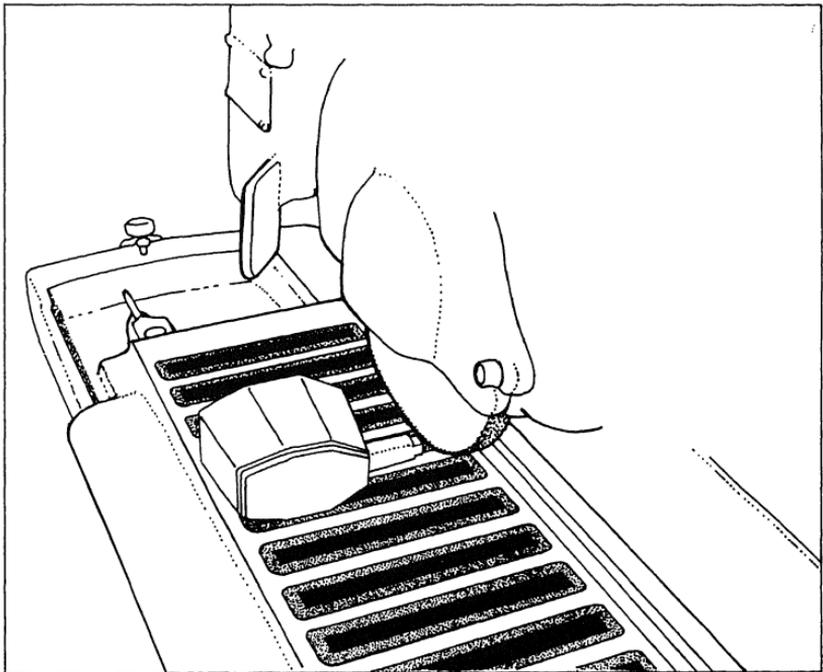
Magnetic chuck used for holding a tool grinding jig.
